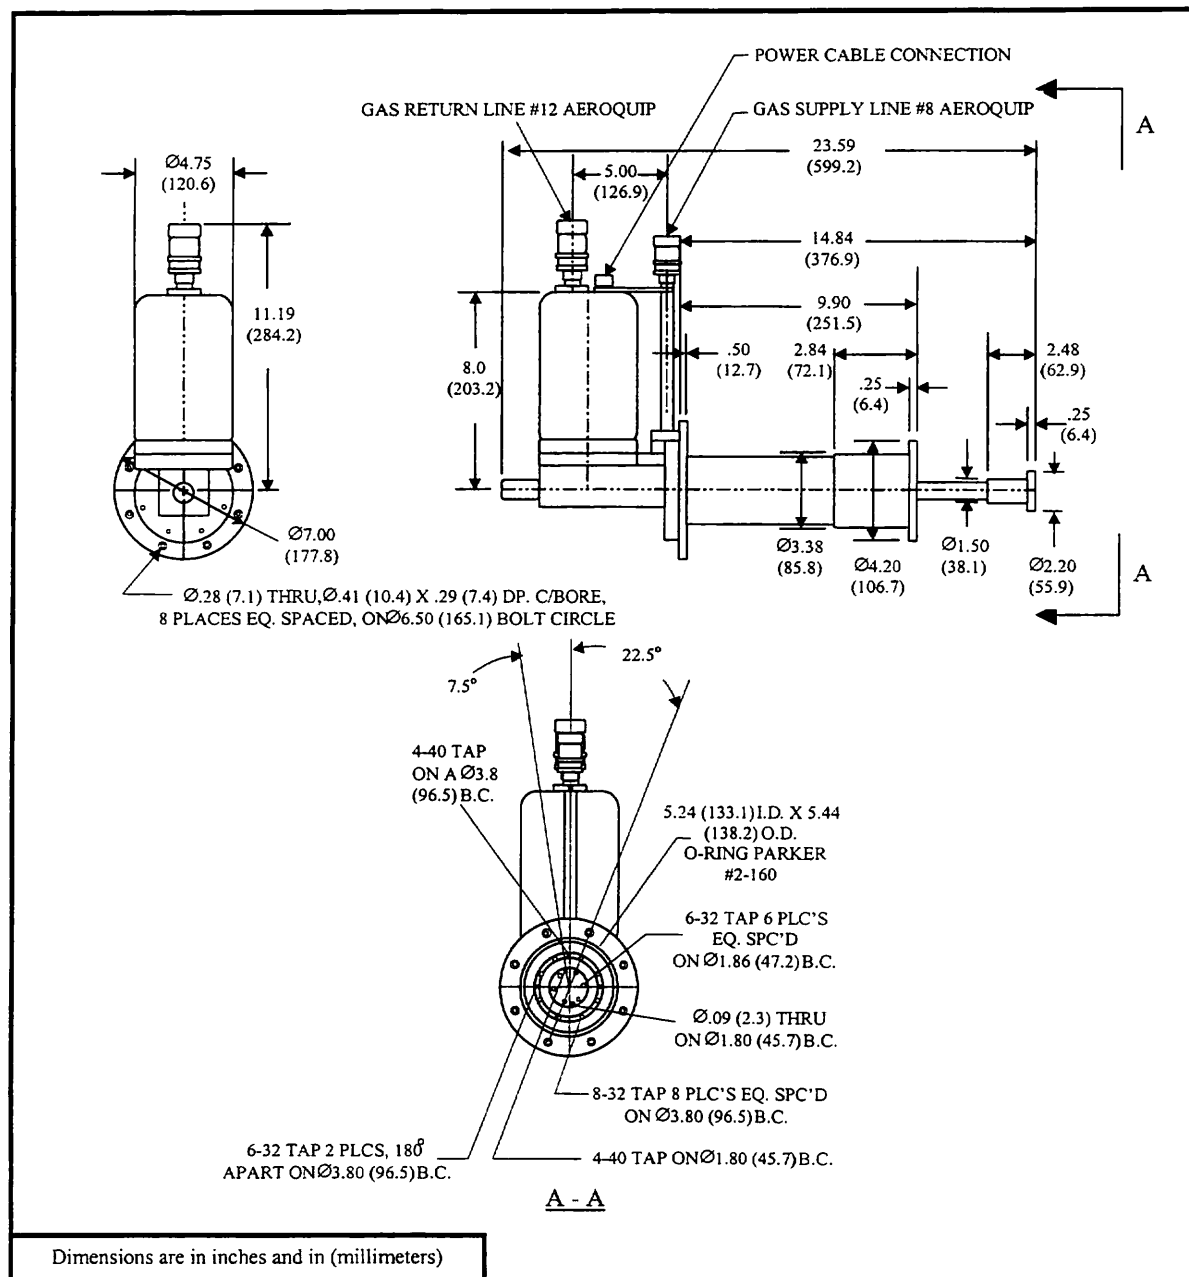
OUTLINE DRAWING FOR THE COOLPOWER 065
